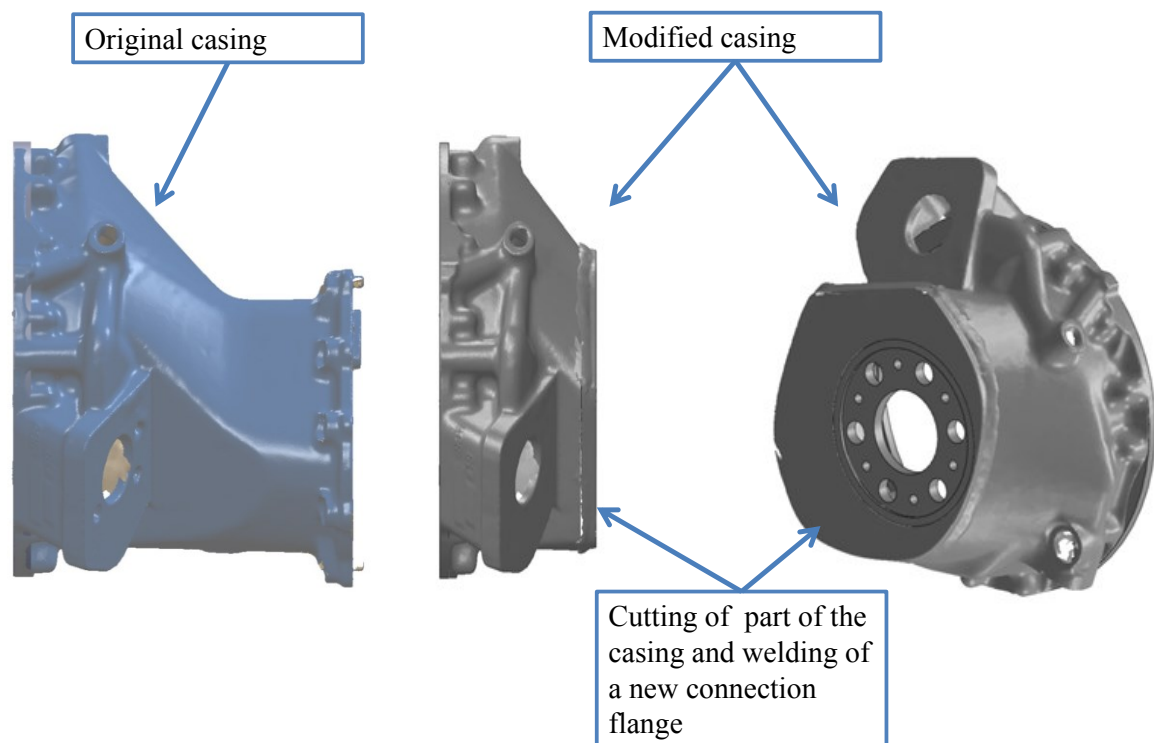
Modification of the original epicyclic gearbox of the Allison 250-C18 turboshaft engine: the original component (on the left) was scanned and modified by welding it with a new flange (on the right)
